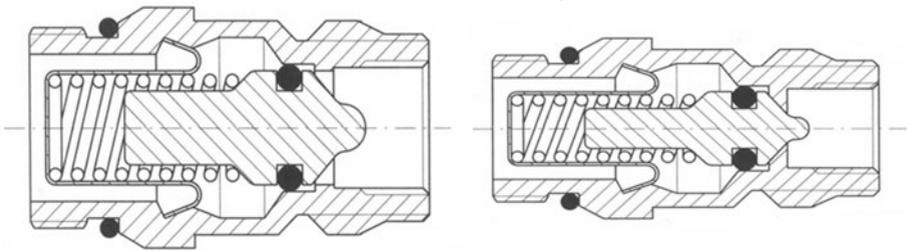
Service valve examples: on the left service valve for high pressure side, on the right service valve for low pressure side.
